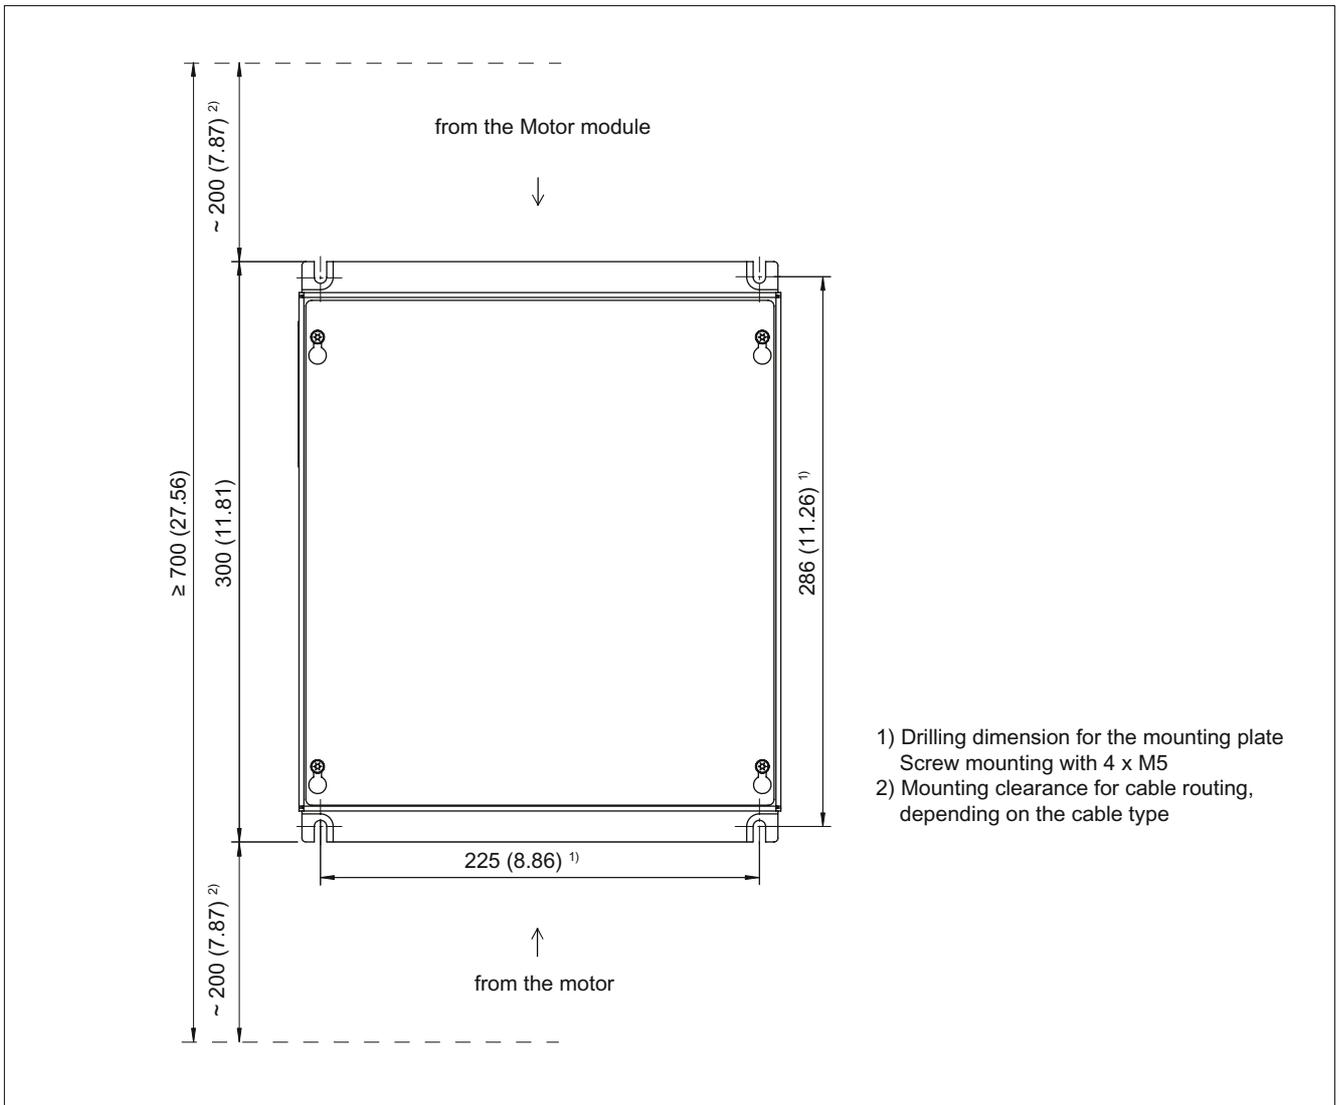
Mounting dimensions for a Voltage Protection Module VPM200
